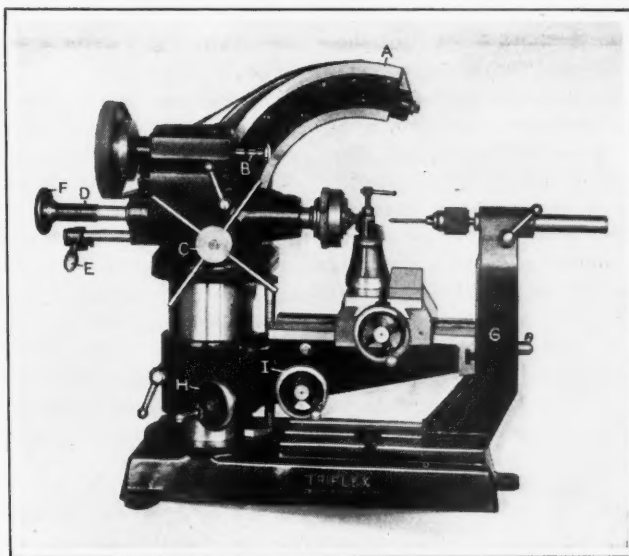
Combination Bench Lathe and Milling and Drilling Machine brought out by the Triplex Machine Tool Corporation
